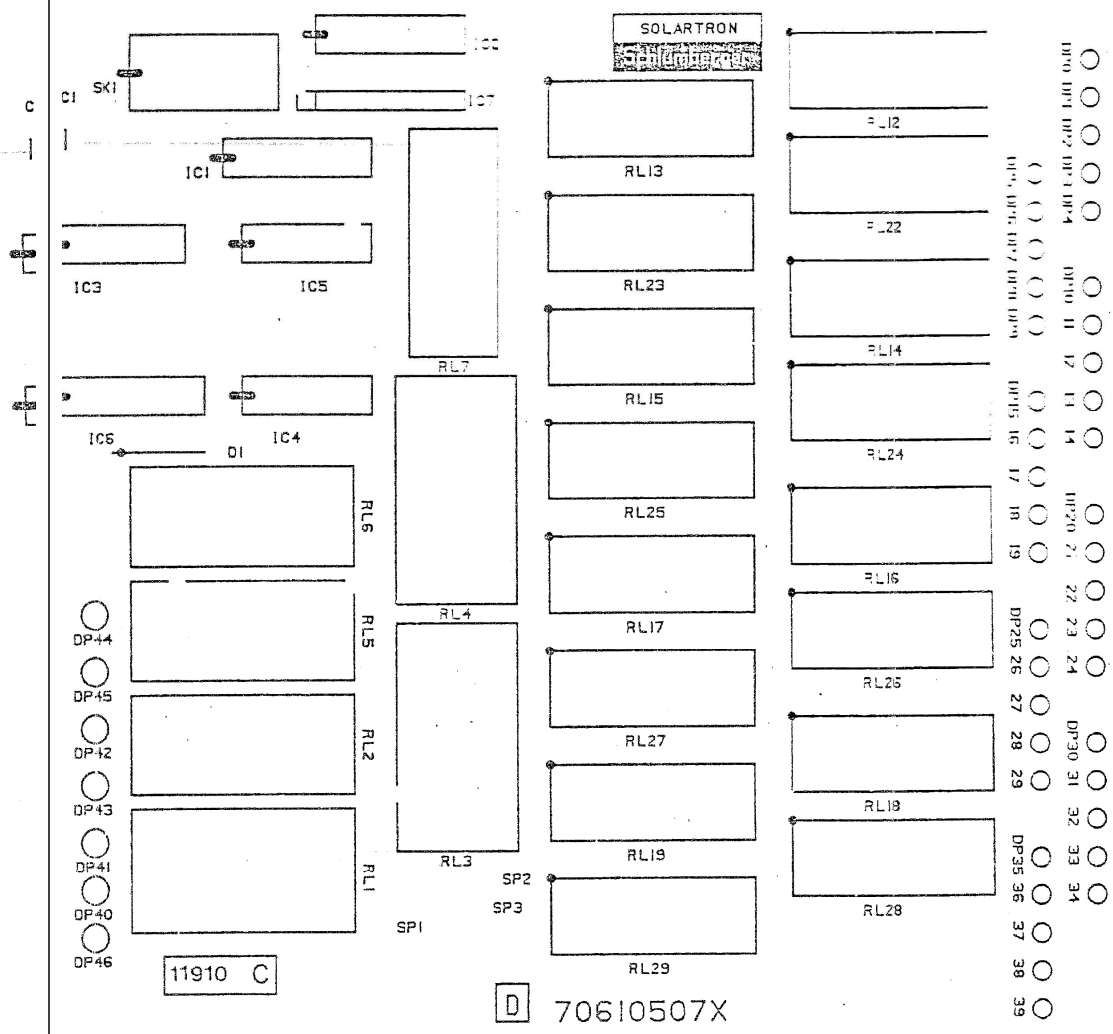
PCB 7, Sheet 2 of 2, Scanner Option
